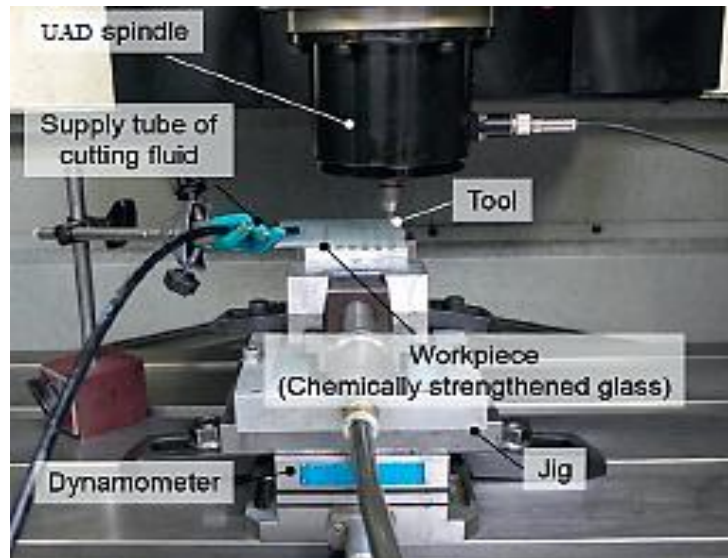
Rotary ultrasonic drilling setup and tool holder.
